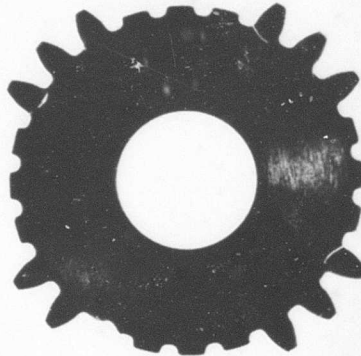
Photograph of Section Through Test Gear Showing Carburized Case Depth Around Root Fillet Contour.
